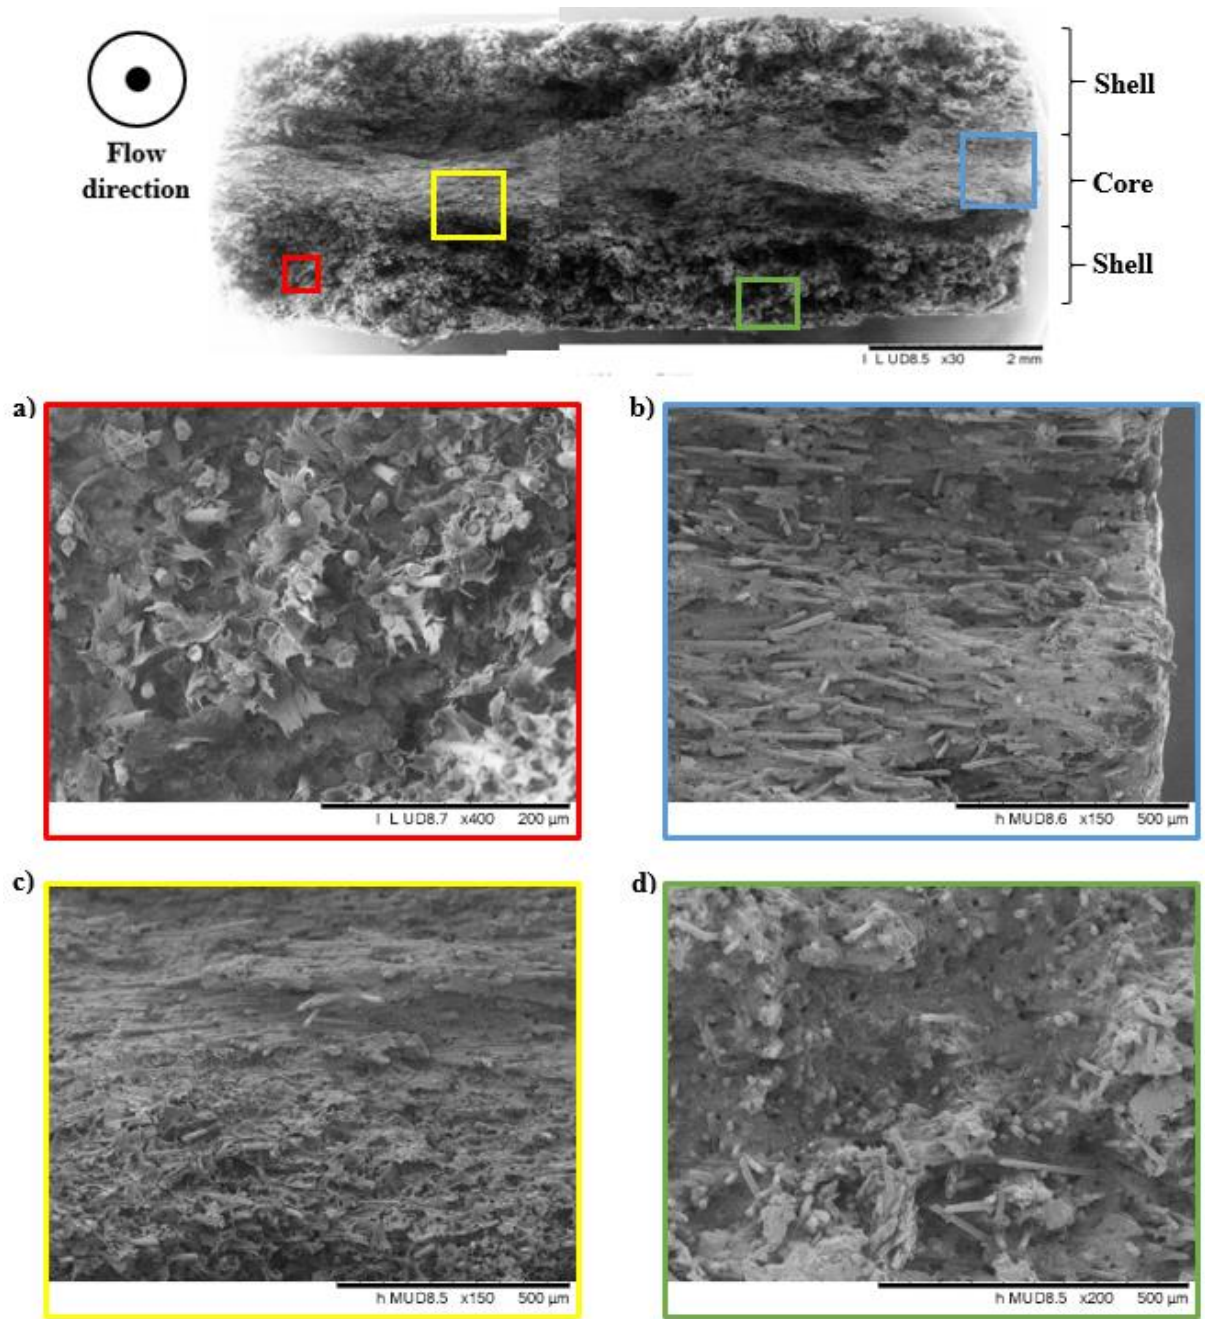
Fracture surface of a tensile 0° specimen at 50° C
